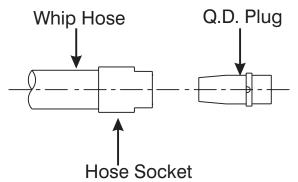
Whip Hose, Socket and Q.D. Plug.
